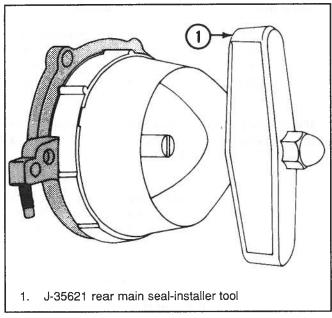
Installing Rear Crankshaft-Oil Seal
